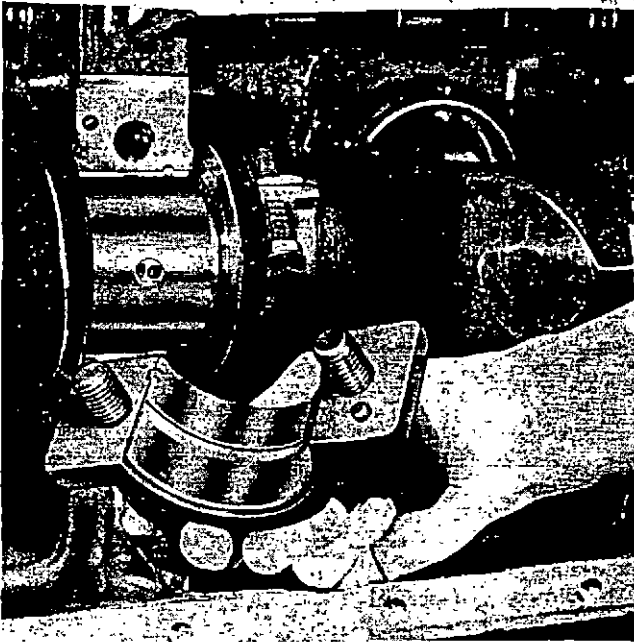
Inspecting Main Bearing and Crankshaft
